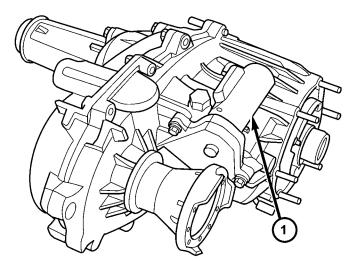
Shift Motor - Shown Inverted - Typical 1 - SHIFT MOTOR
